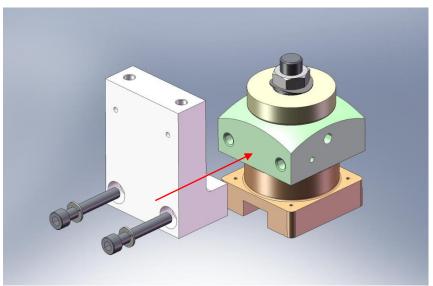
Vertical Sensor Head Bracket mounted to Sensor Head Mount.
